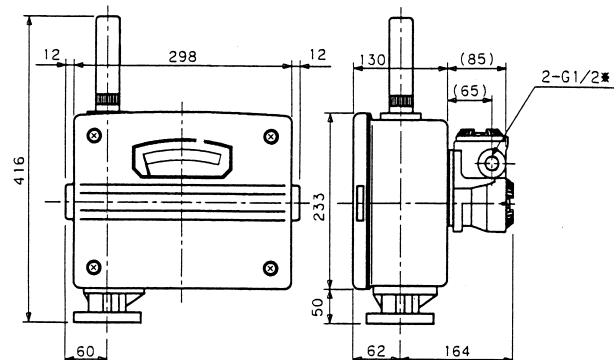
Indicator and transmitter assembly (FS-512S)
